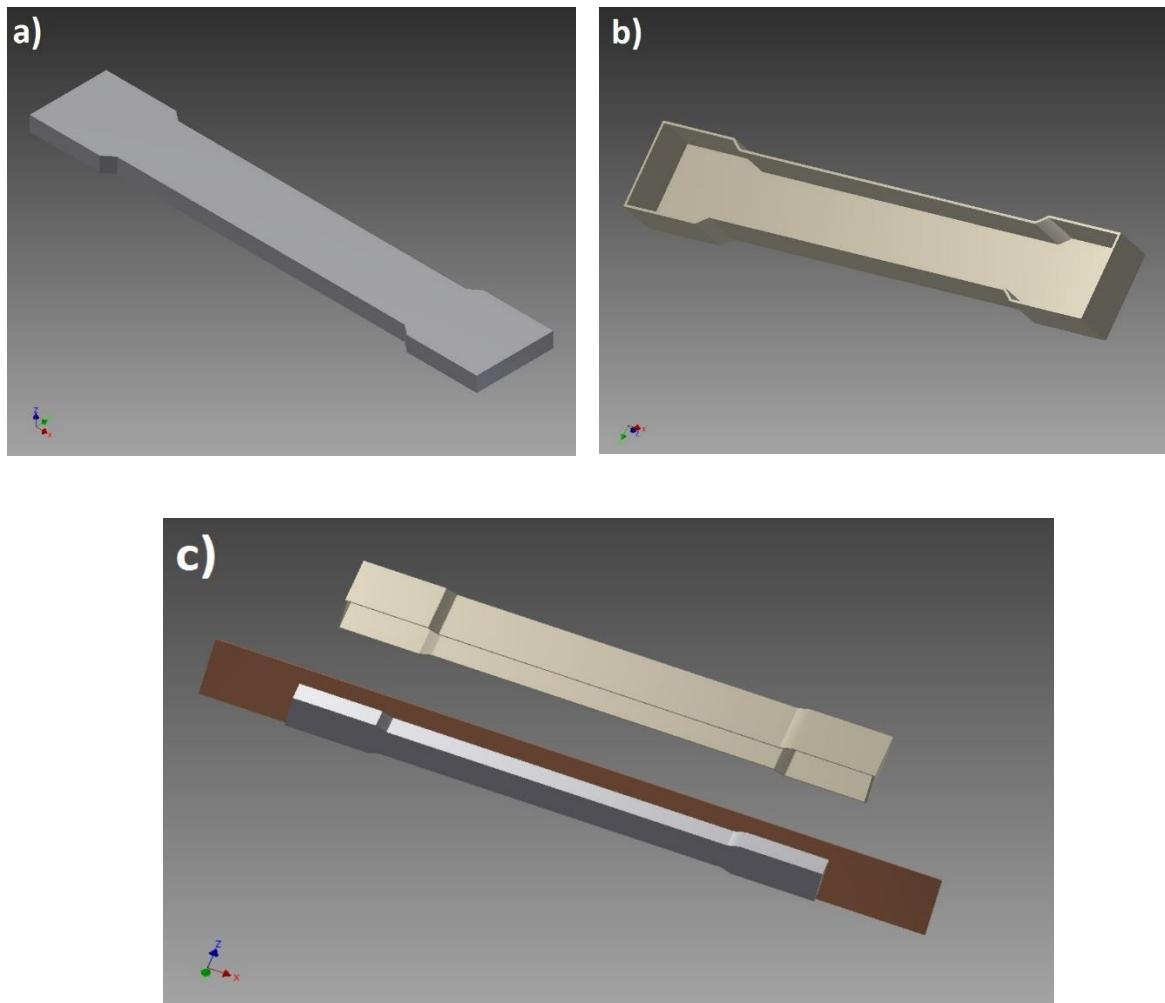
Punch and die tool: a) Punch; b) Die; c) Assembly of the tool
